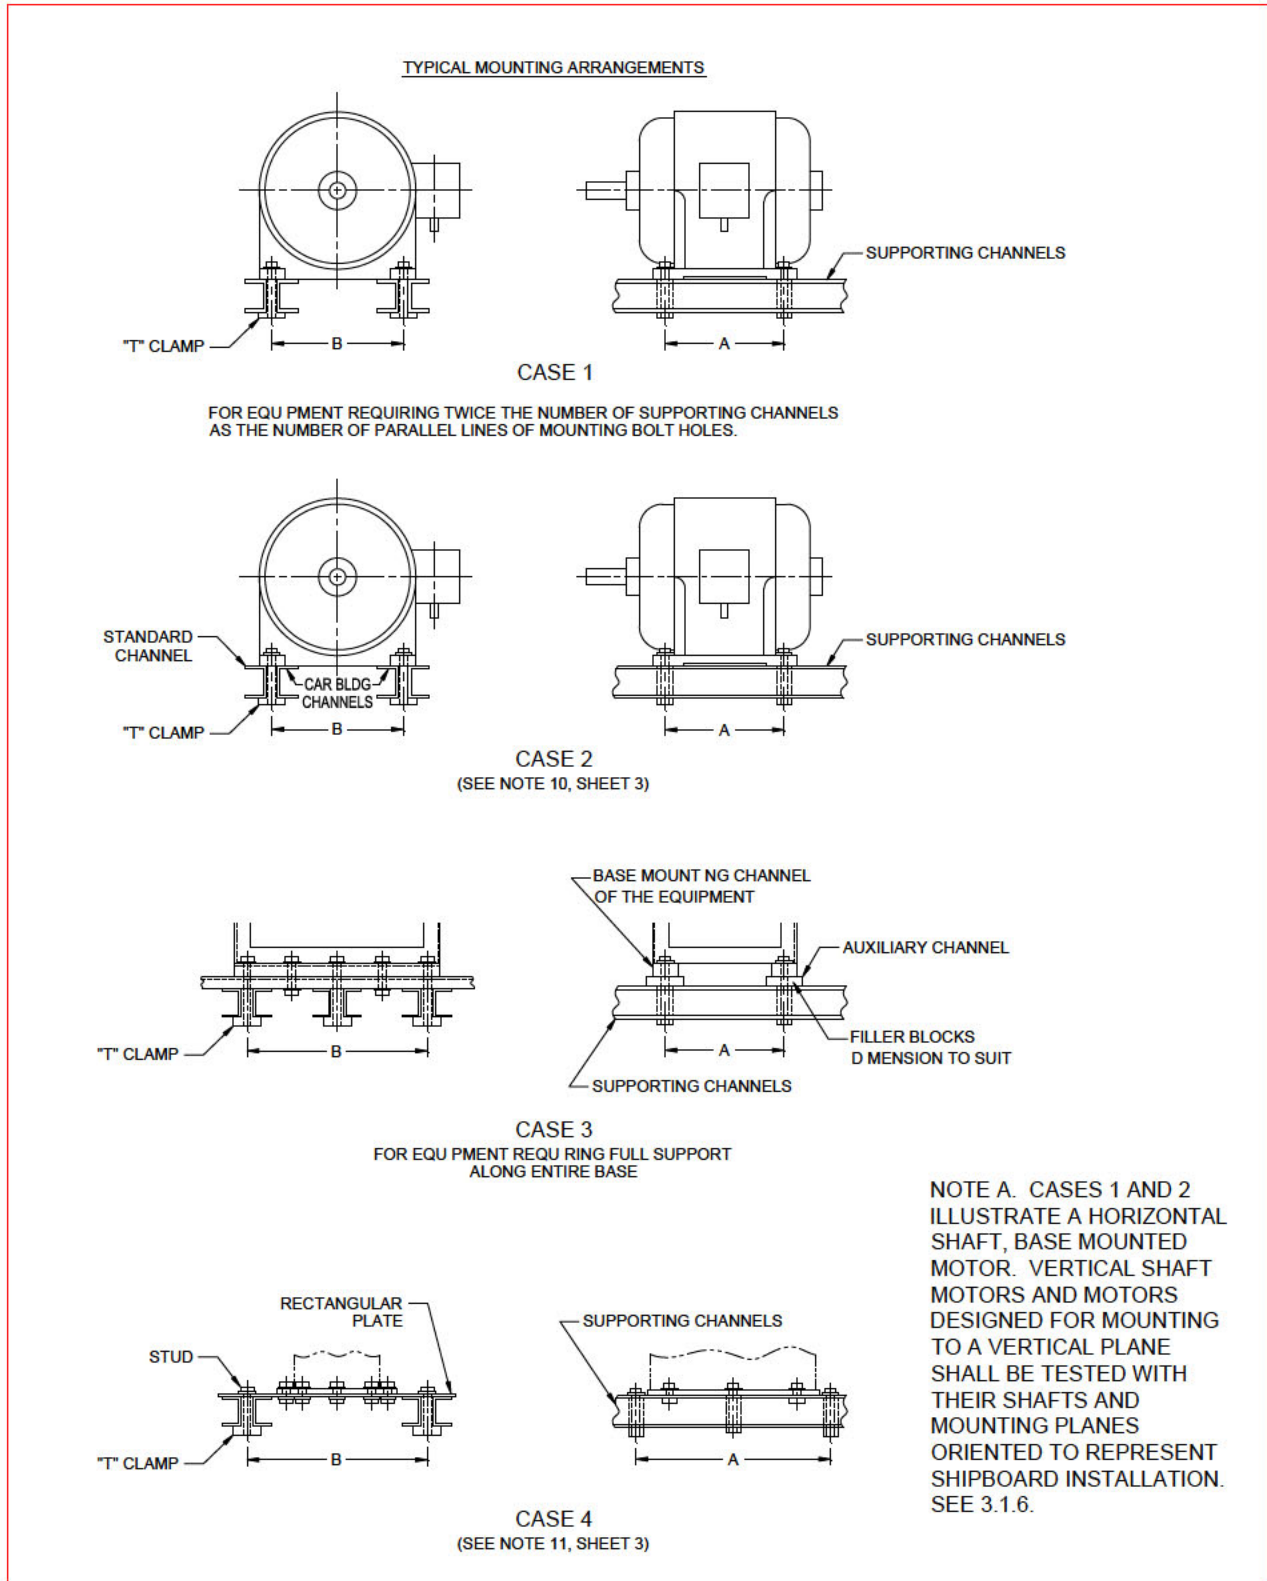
Standard mounting platform for testing equipment on the MWSM. (Sheet 2 of 3)
